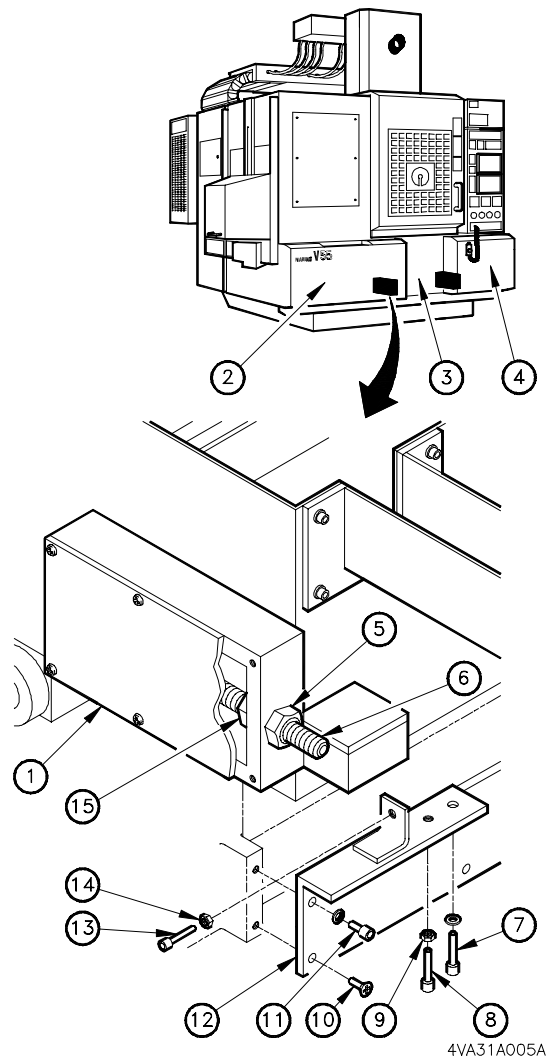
SCRAPER CHAIN ADJUSTMENT
